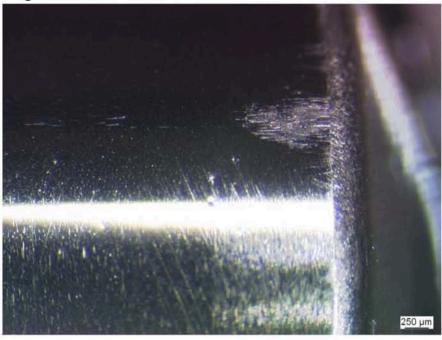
Pump no. 1 Roller, minor cracks on edge
